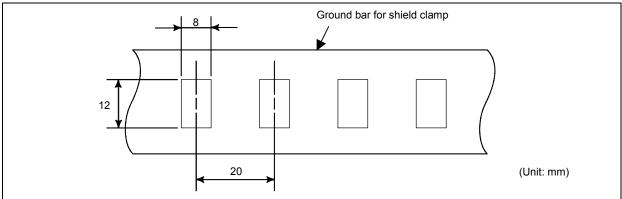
(d) Ground bar for shield clamp (hole arrangement and dimension drawing)
